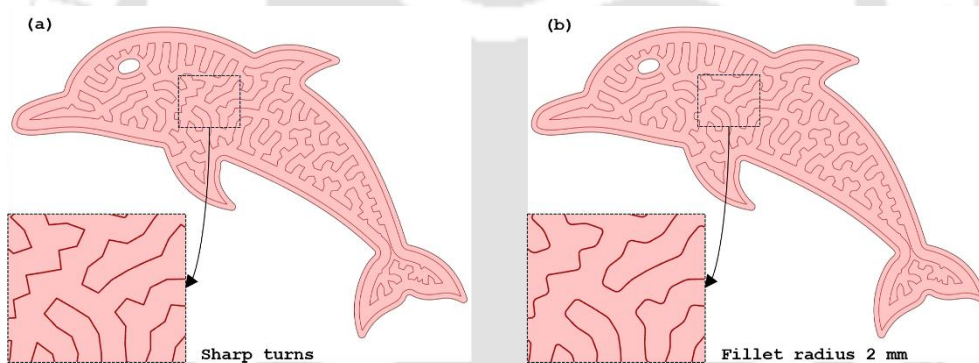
Sharp turns conversion (a) Toolpath with sharp turns, (b) Toolpath with 2 mm fillet radius
